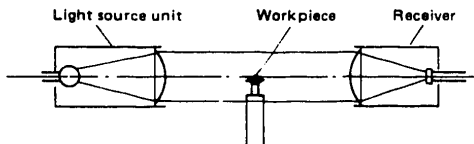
Ordinary Pass-Through Photoelectric Unit Is Difficult to Use for Inspection of Small Workpieces
